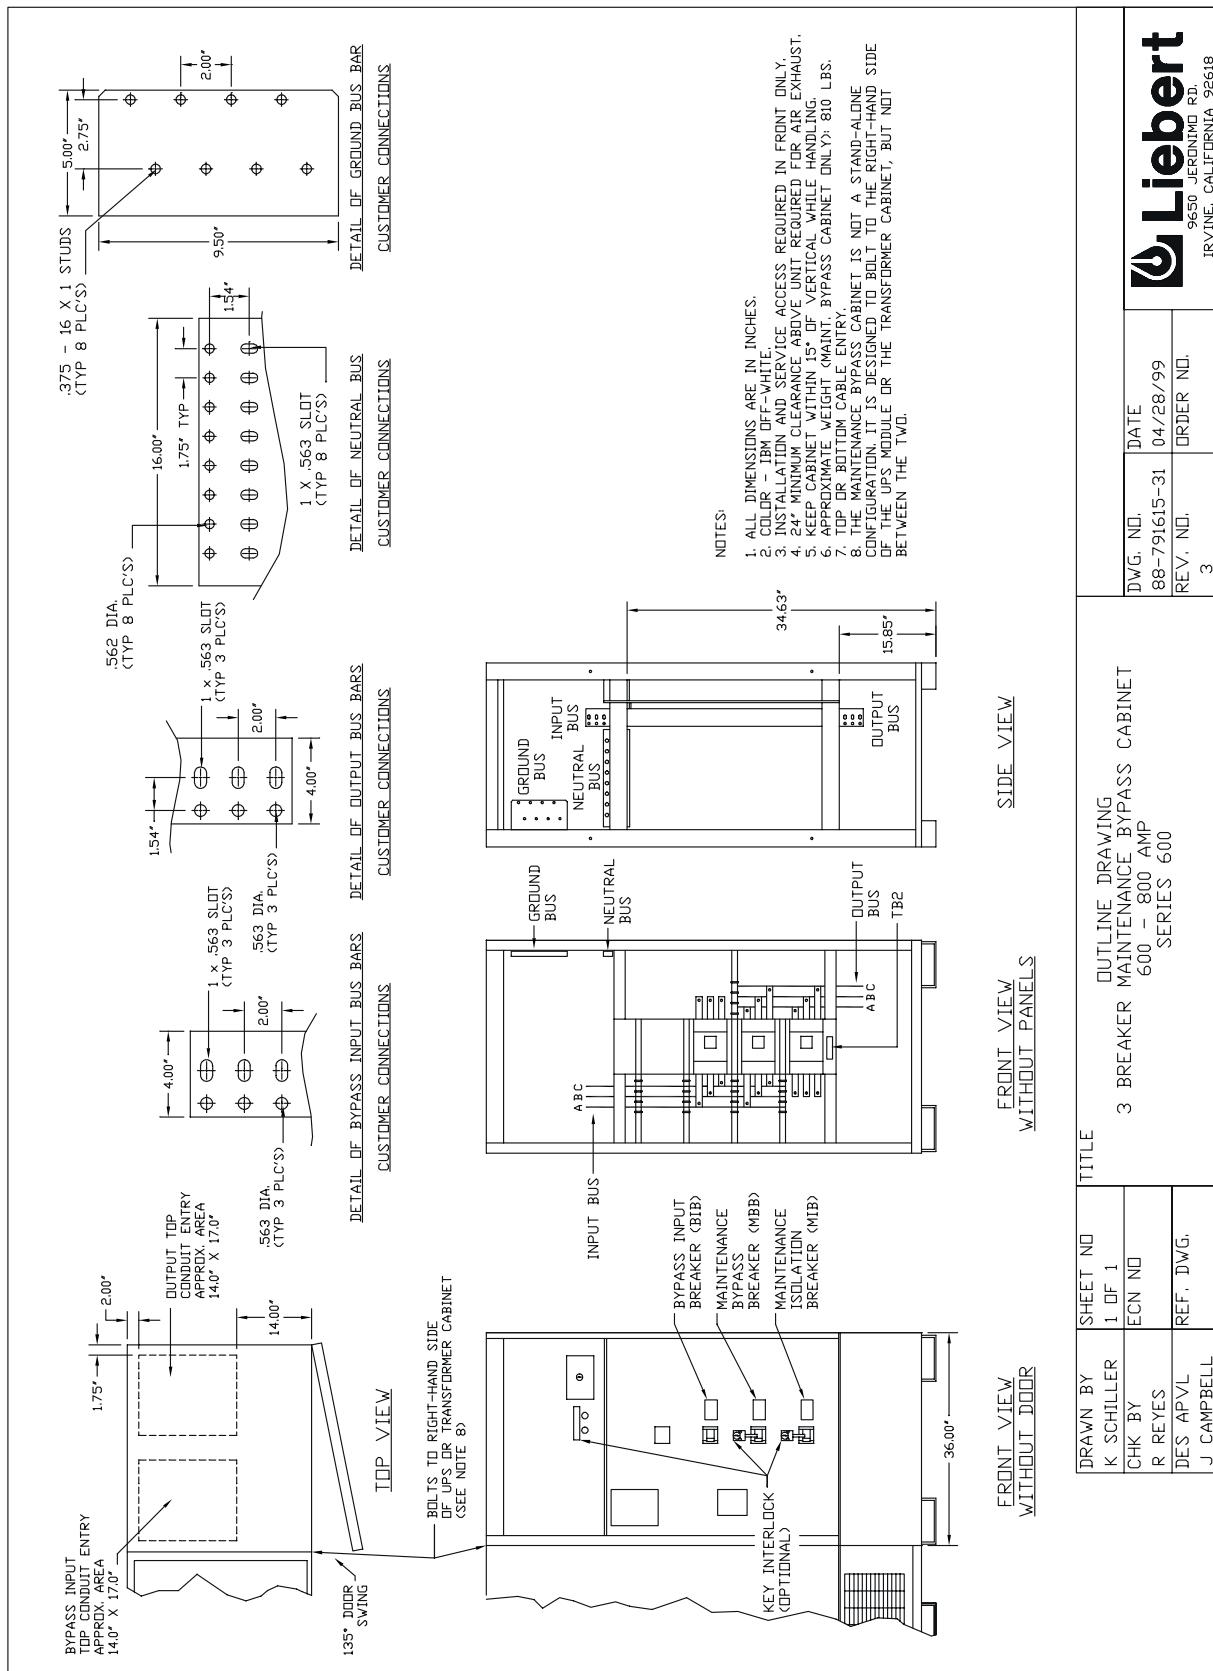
Outline Drawing, 3-Breaker MBC, 600-800 Amps
